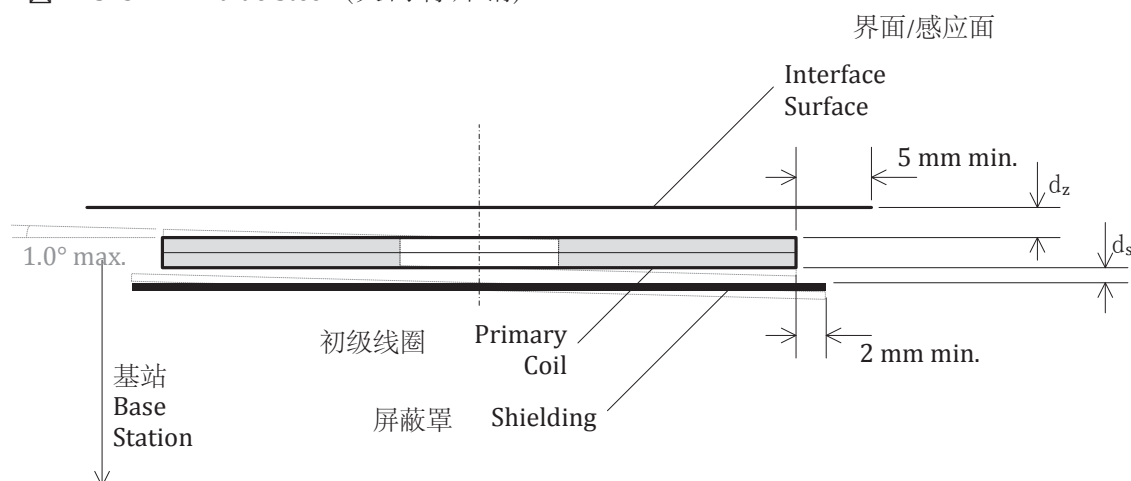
Primary Coil assembly of Power Transmitter design A2
